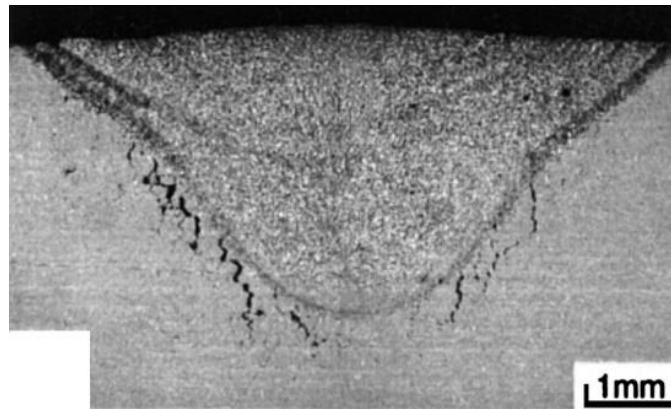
He-induced cracks in the weld HAZ of SS containing 8.3 appm He [1]. Note that many cracks exceed 1 mm in length, and the total length of macroscopic cracks is well above ~5–6 mm.
